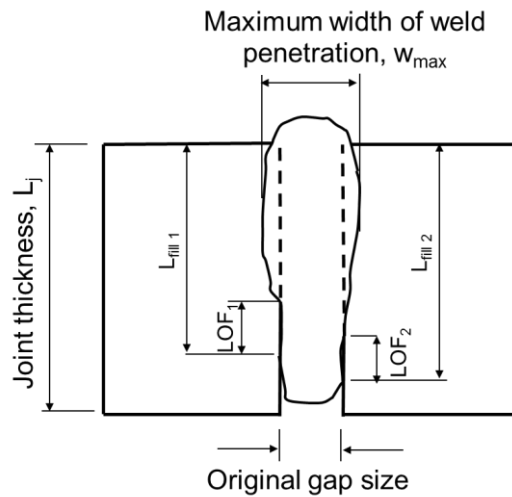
Method of measurement variables for evaluate weld imperfections (for horizontal cutting plan)
